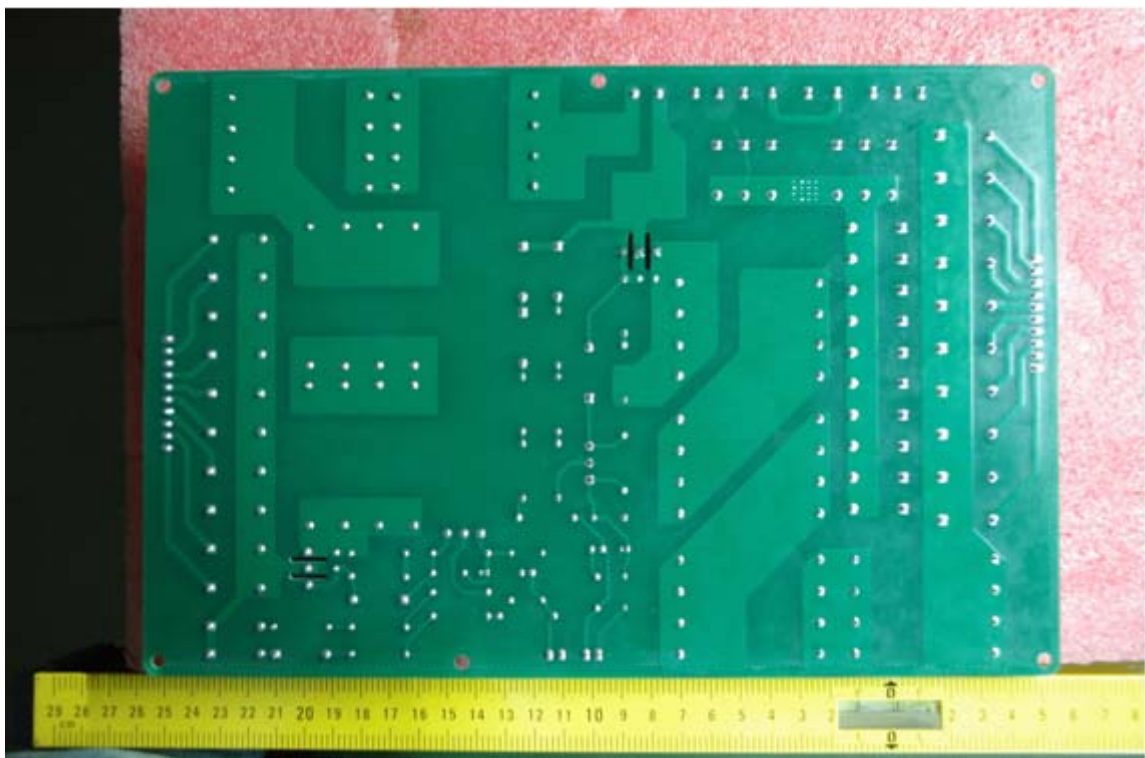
Board SNT\_PCB\_3320\_QD, traces side view
